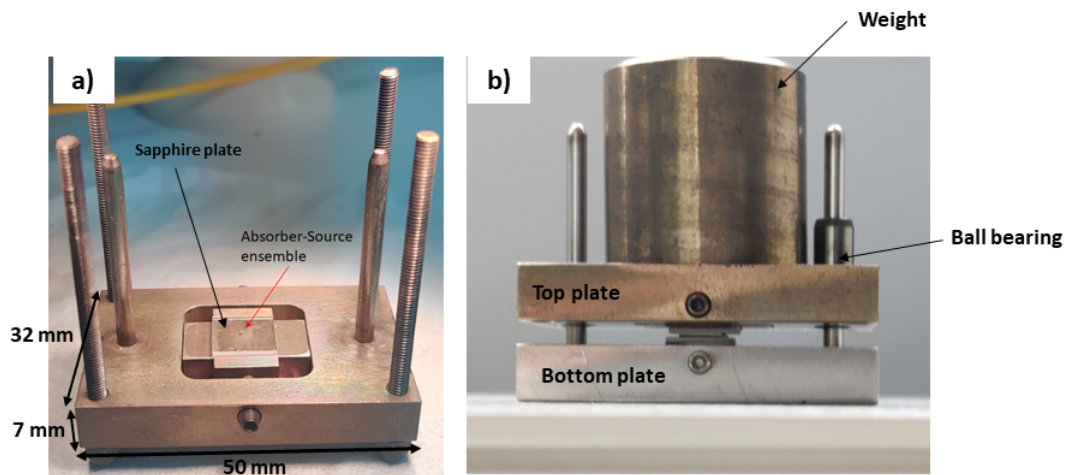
a) The complete absorber-source ensemble on the bottom plate of diffusion welding setup. b) Complete diffusion welding setup. The force applied during the diffusion welding process is defined by a weight piece placed on the top plate.
